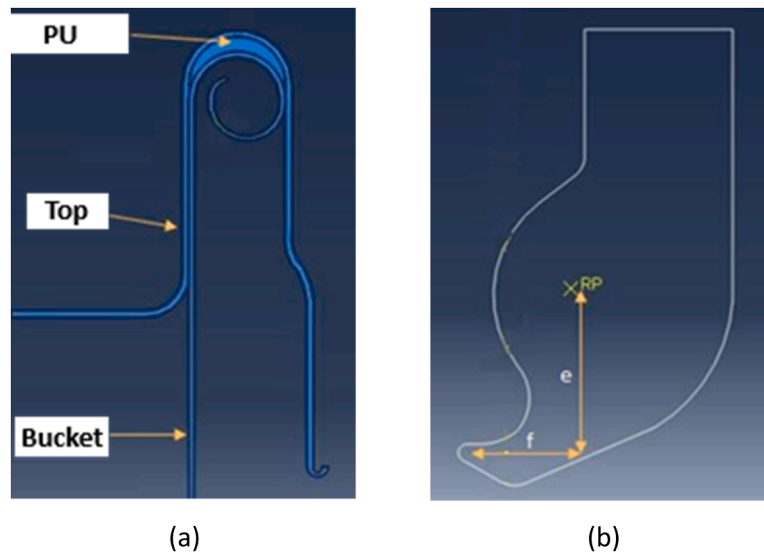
Components used to study the packaging closure. a) top, polyurethane and bucket b) tool gripper.
